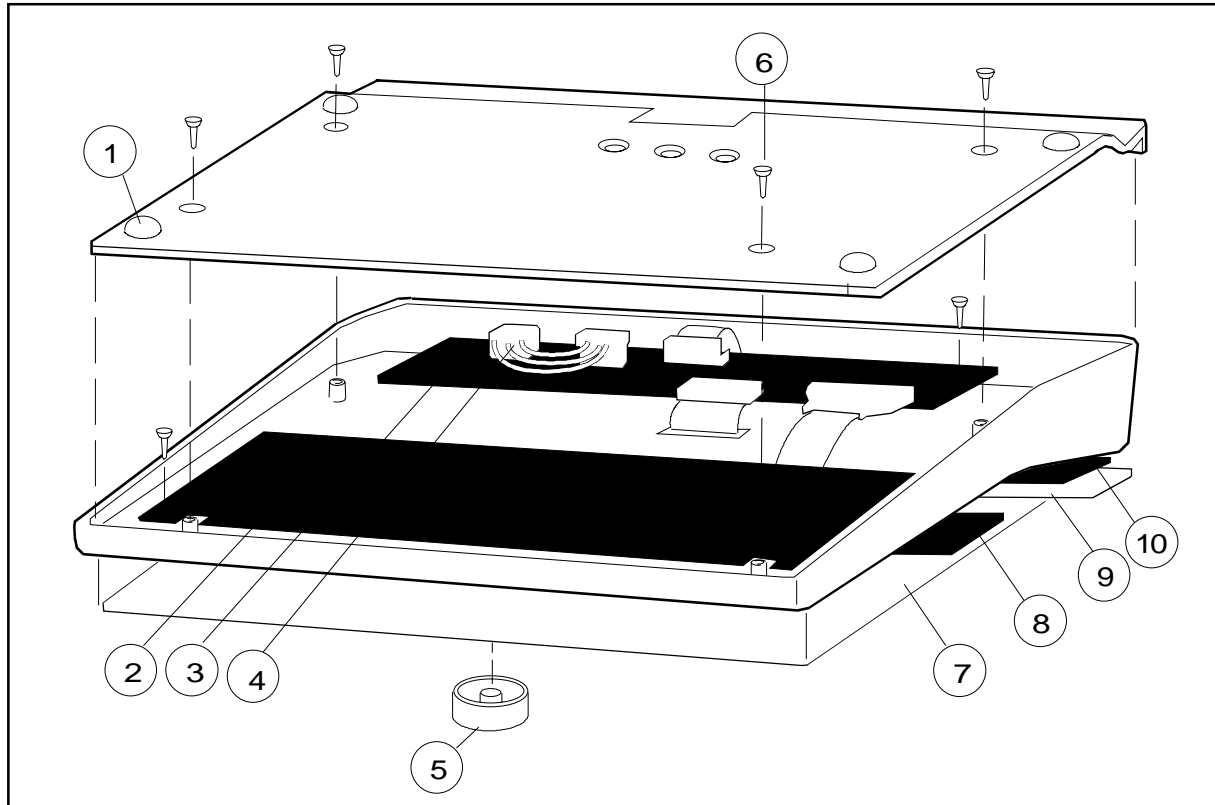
Keyboard, K-CENTRALB, exploded view
